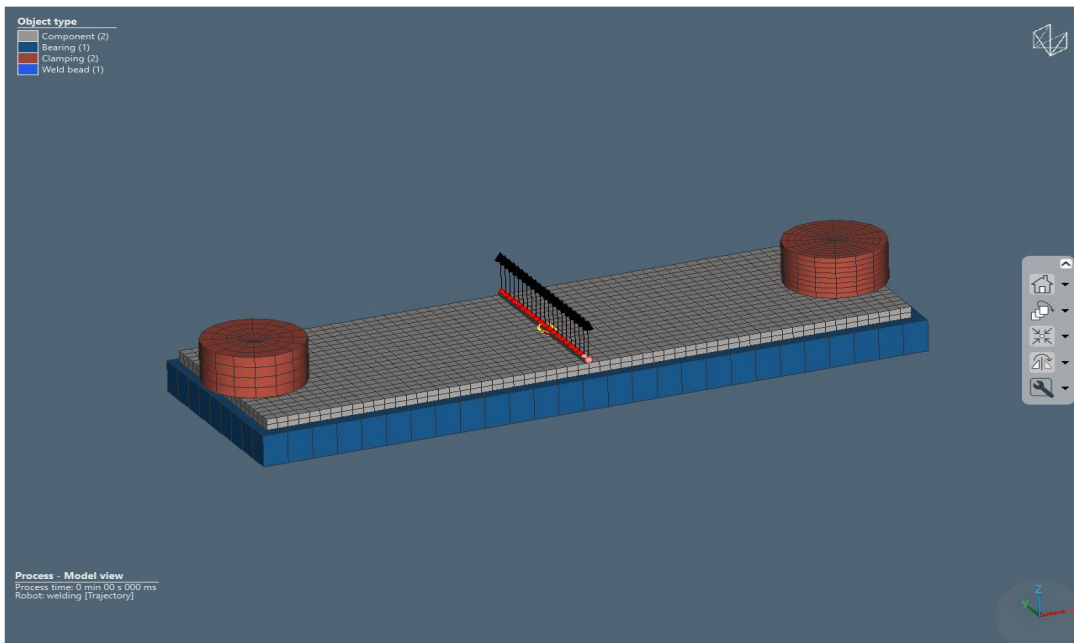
COMPONENT, BEARING, CLAMPING AND WELD BEAD
